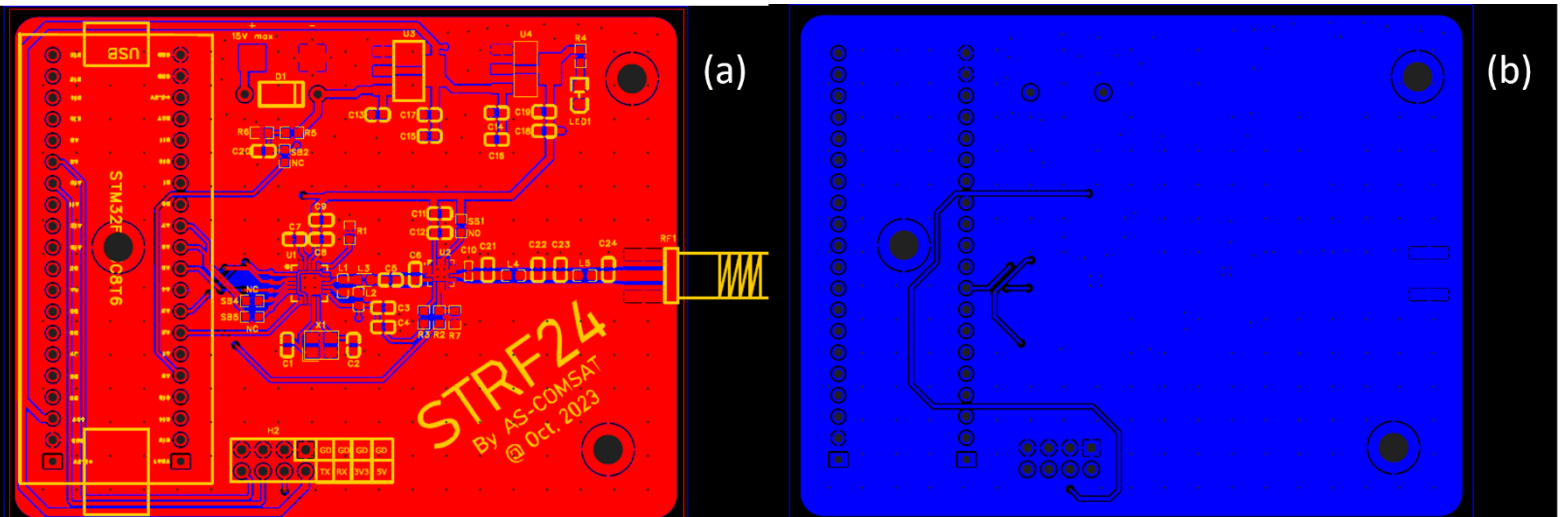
TT&C transceiver V2 PCB layout. (a): top layer, (b): bottom layer
